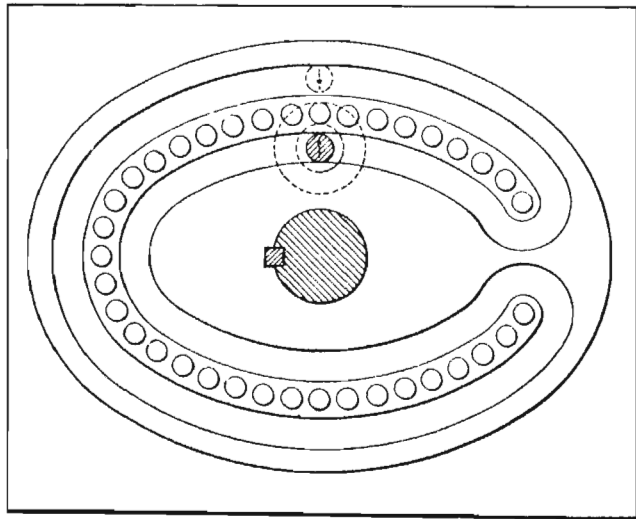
Reversing Mechanism Similar to that Shown in Fig. 2, but Designed to Produce Variable Velocity
